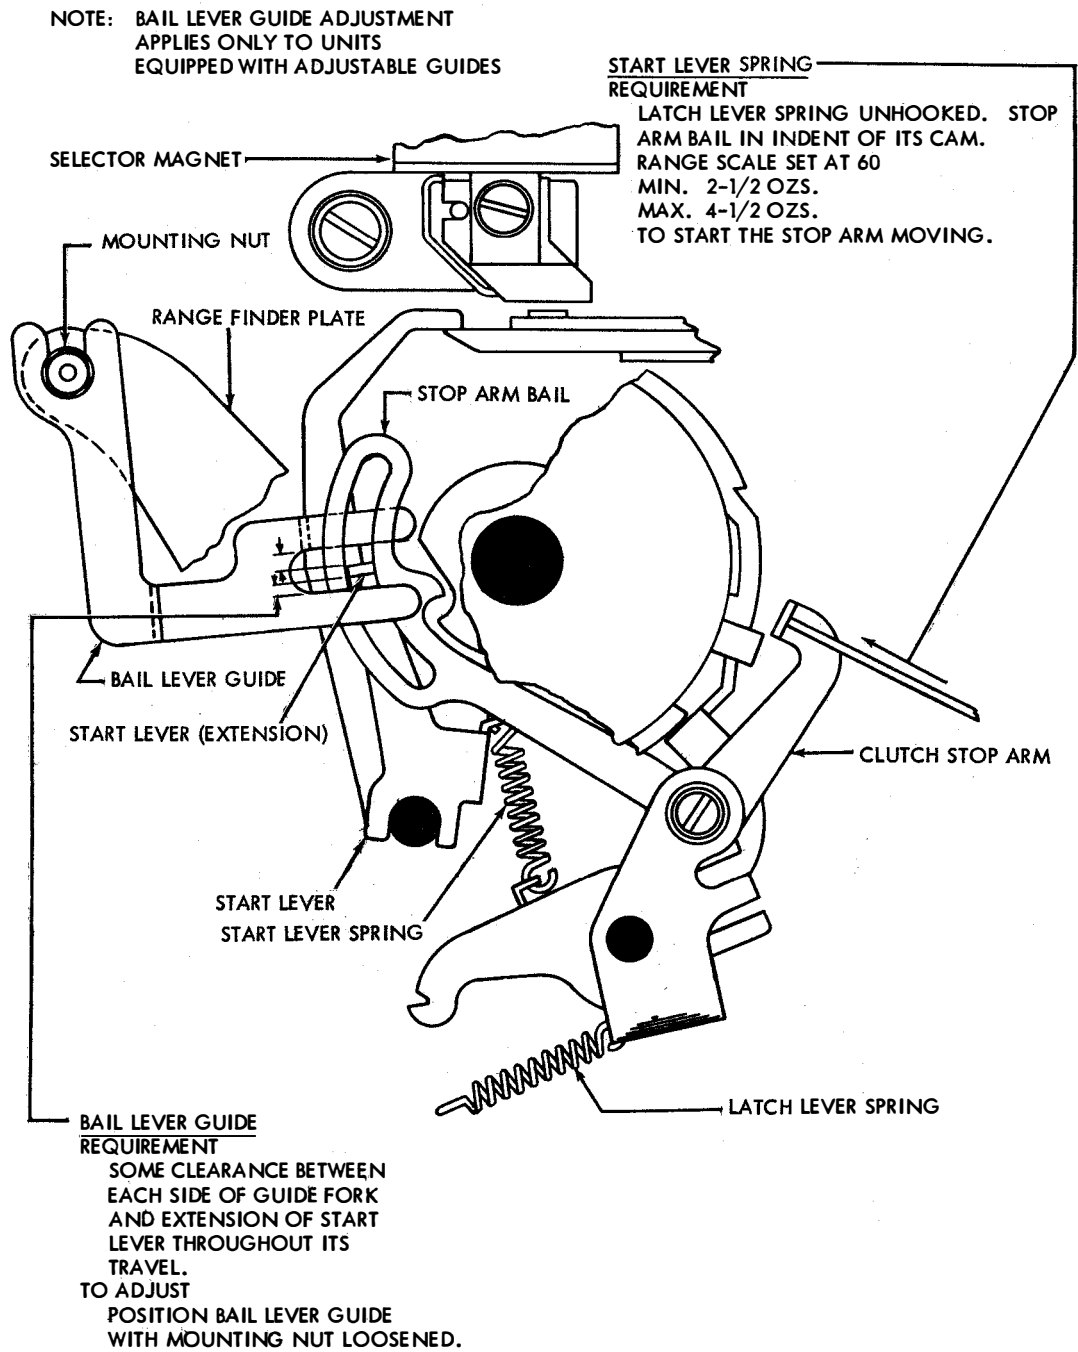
TYPING UNIT, SELECTOR CLUTCH MECHANISM, RIGHT SIDE VIEW
